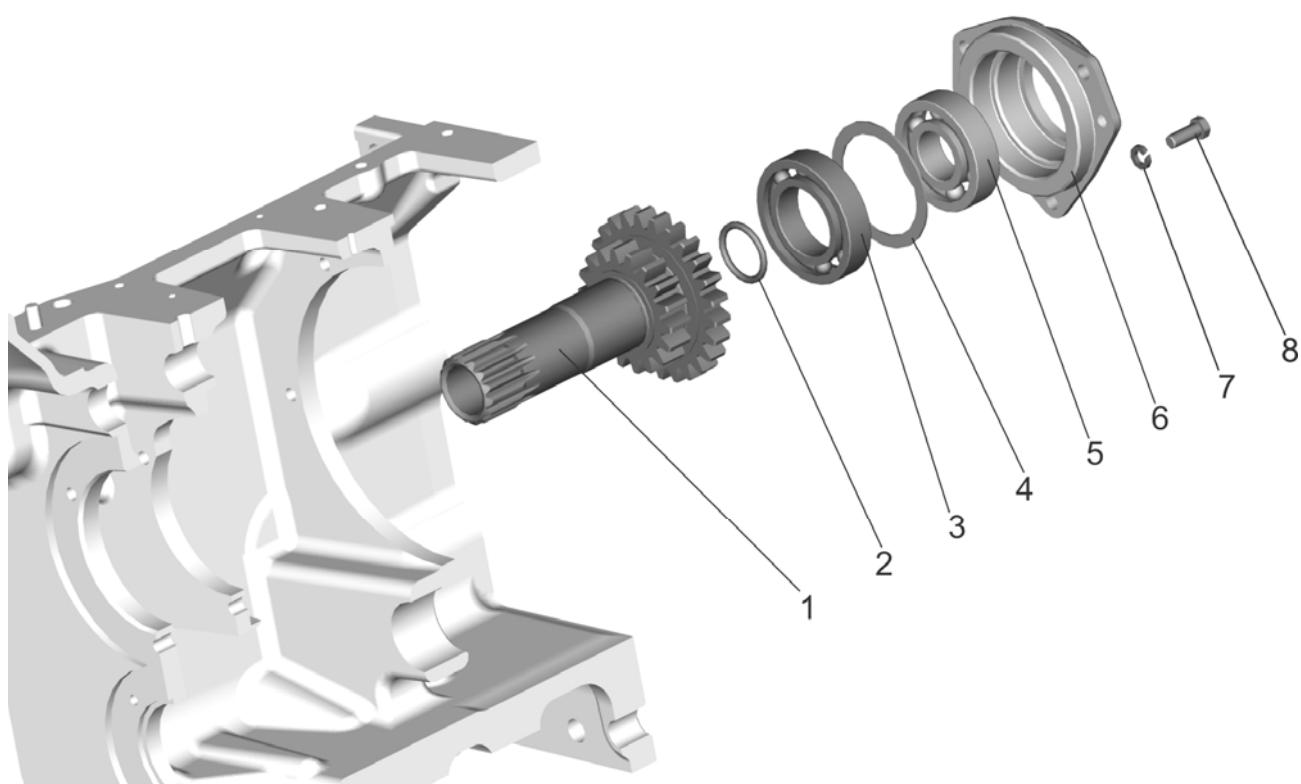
Clutch casing. PTO drive. ($n_{eng}=2200$ rpm)
